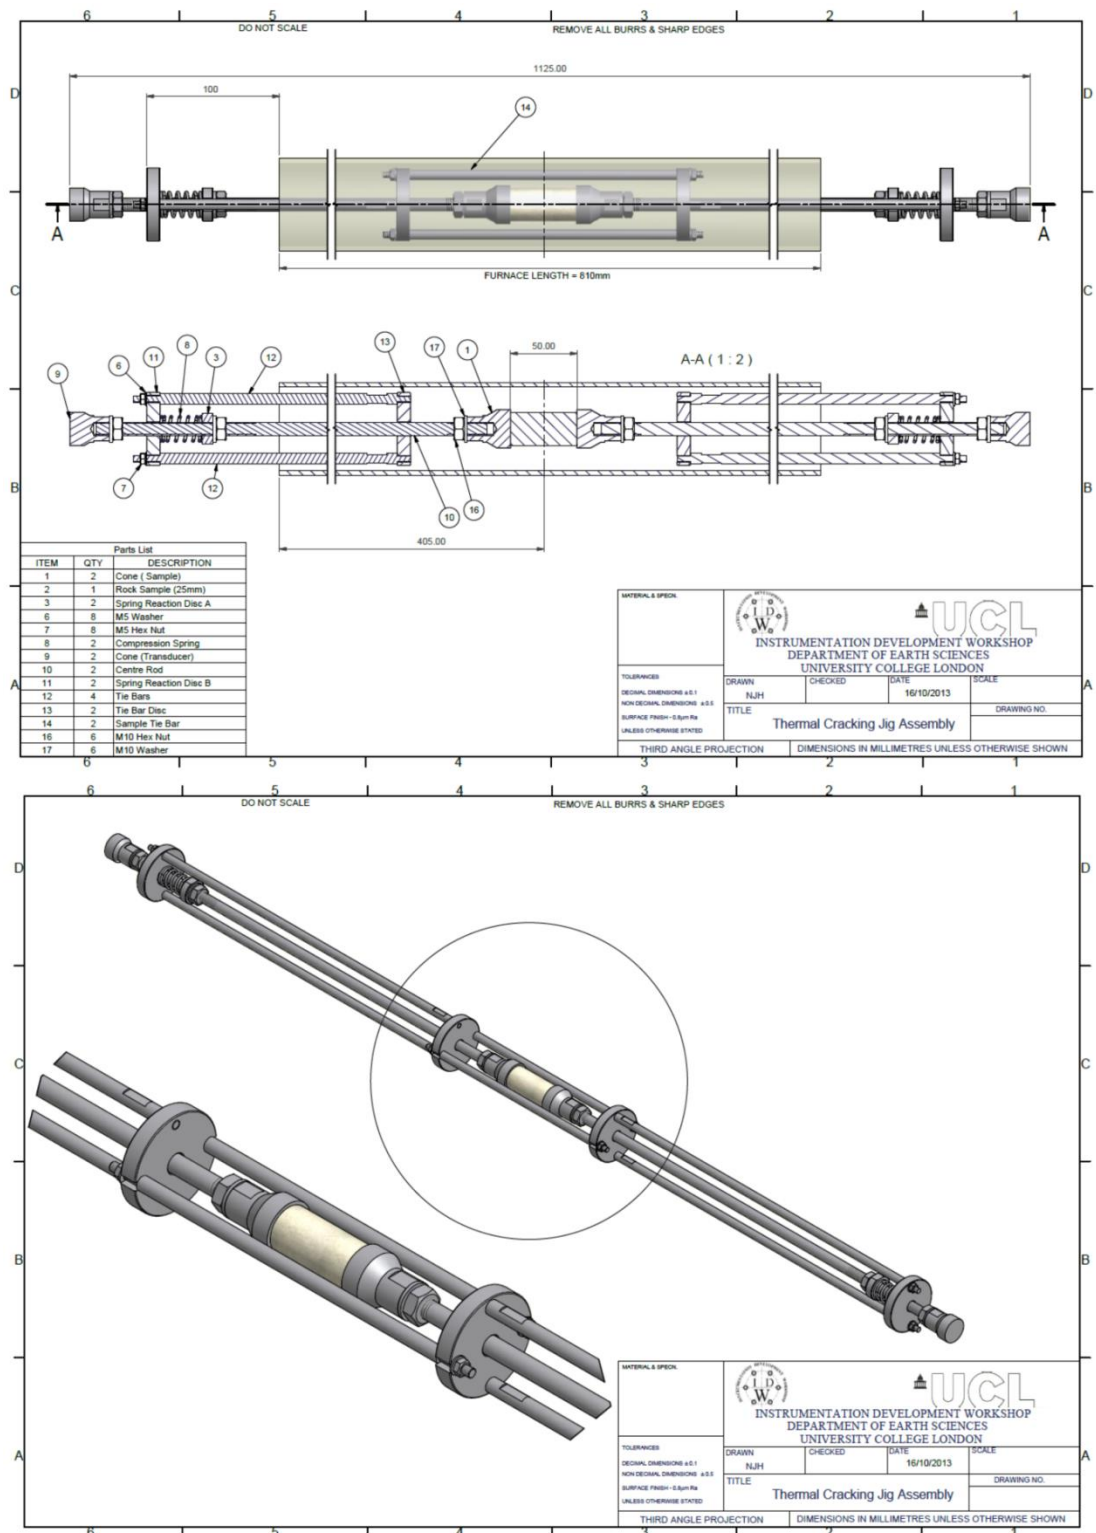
Thermal stressing test jig design and assembly, original drawing by N.Hughes, personal communication (2015).
